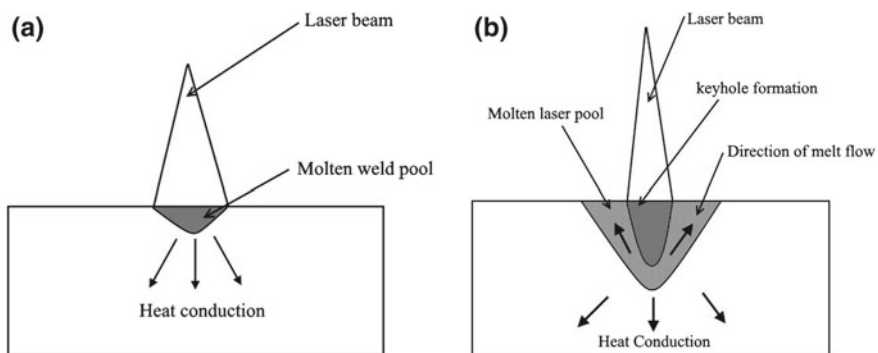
Schematic diagram of heat flow process in laser welding of a mild penetration and b deep penetration
